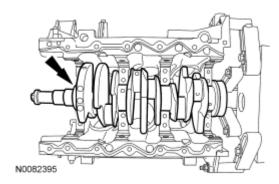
Locating Crankshaft Courtesy of FORD MOTOR CO.
